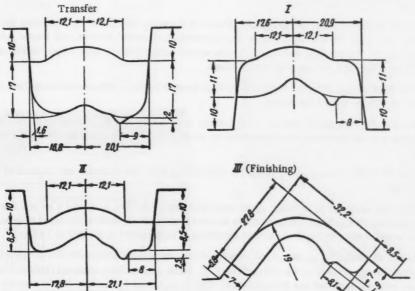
Dimensions of templets of grooves for flanged collar: I-III) Stands.
